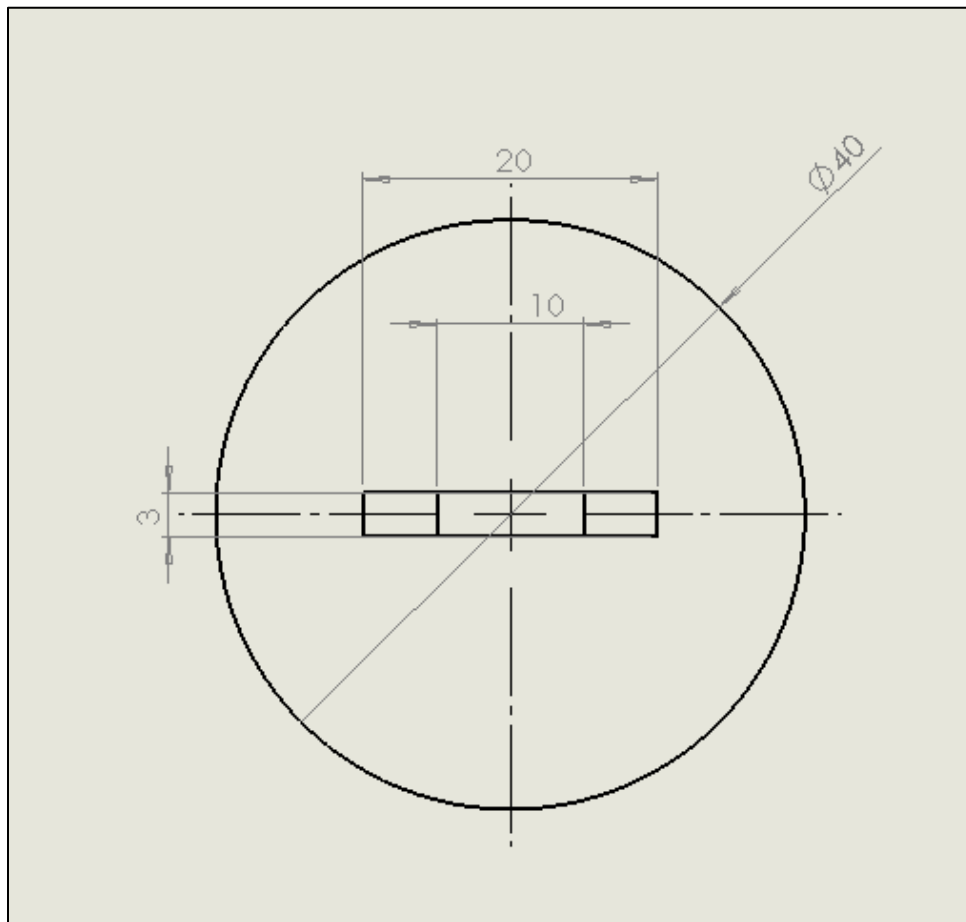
Engineering drawing of top view of CAD model for 3D printed gasket with relevant dimensions displayed.
